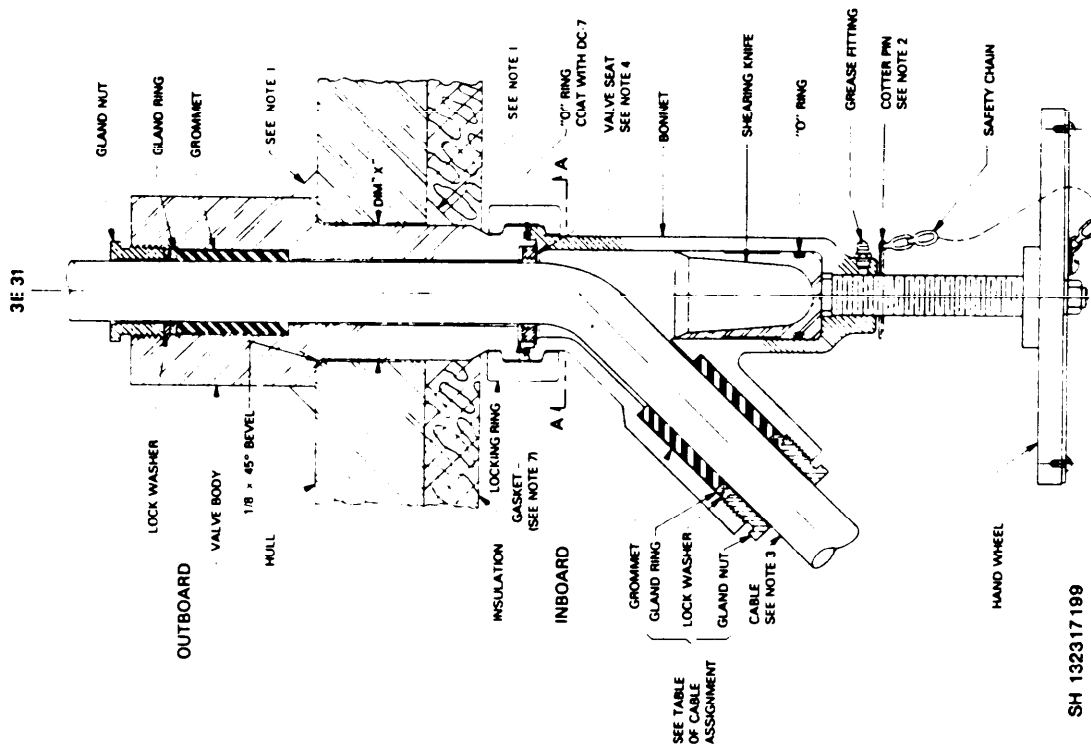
E3 Passing cable through pressure hull of submarines using cable shearing valve
